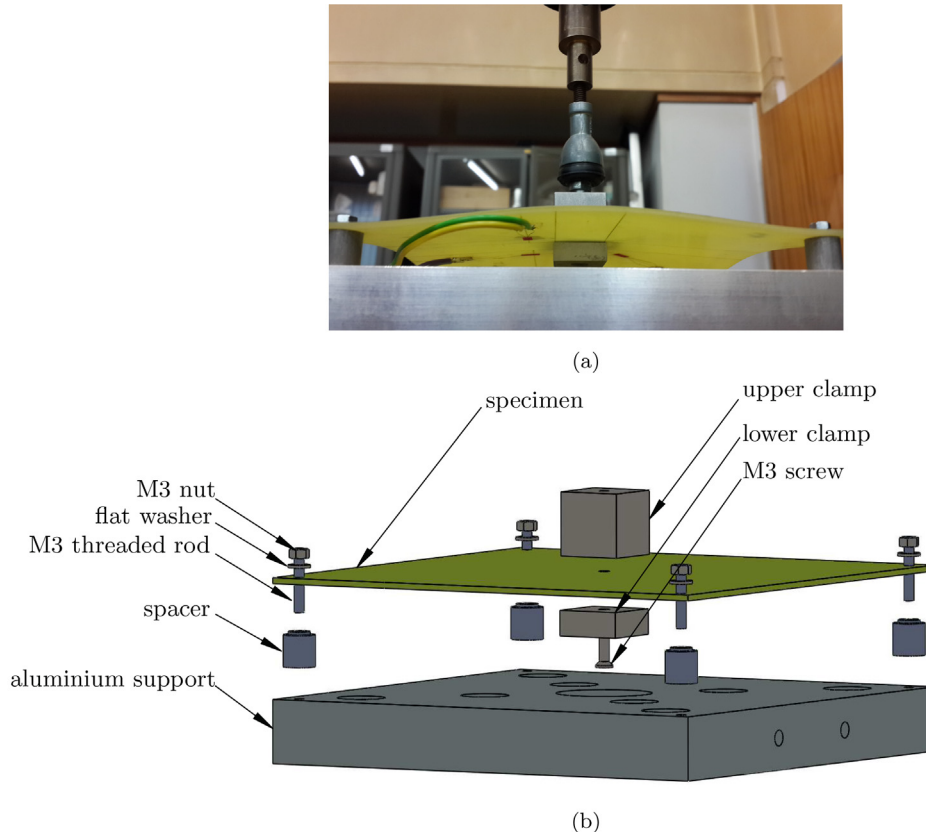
Biaxial bending prototype: (a) Real view, (b) Exploded view.
